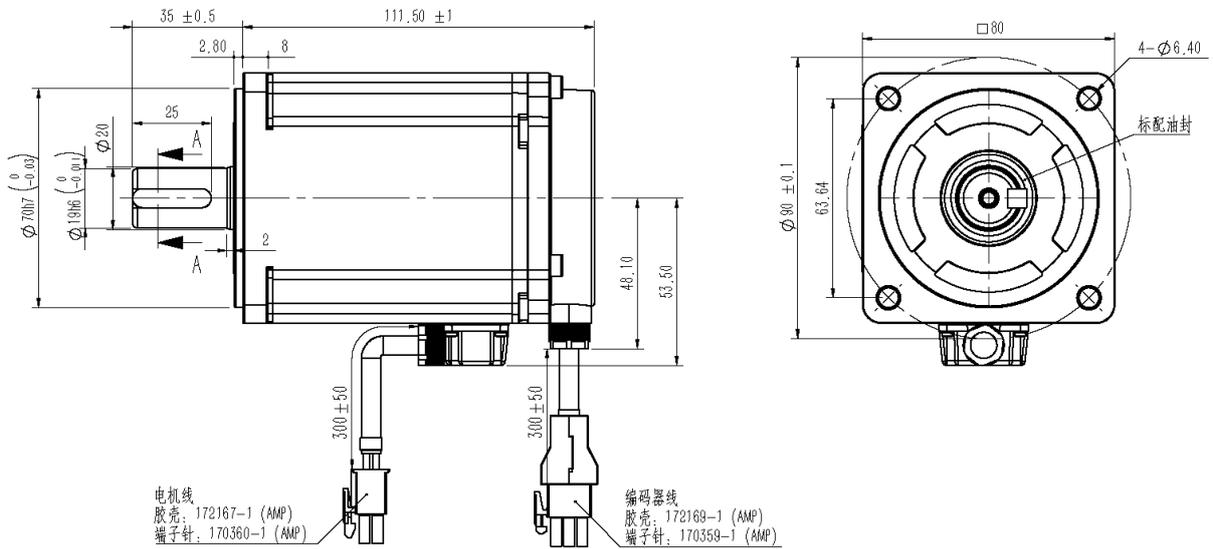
1000W servo motor (without holding brake) external dimension drawing
